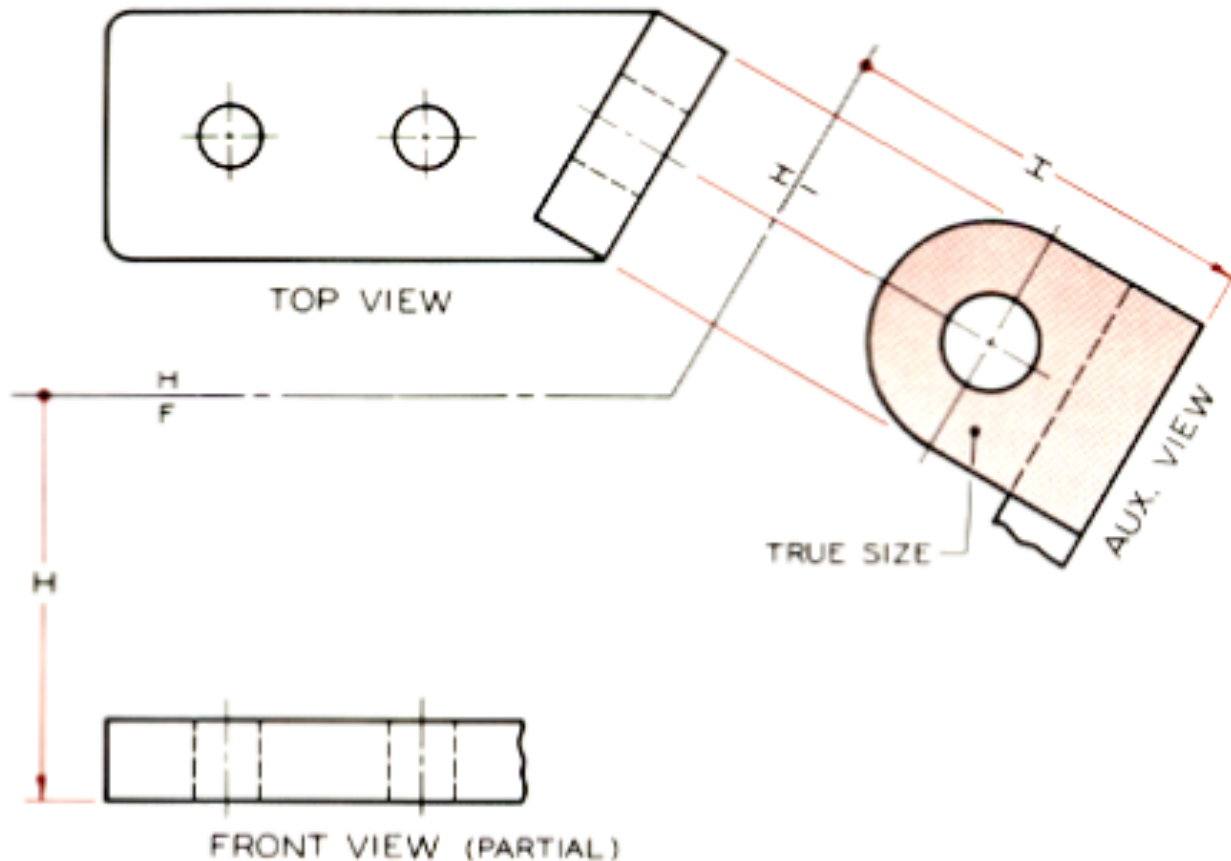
When the object is drawn on a sheet of paper, it would be laid out in this manner. The front view is drawn as a partial view since the omitted part is shown true size in the auxiliary view.
